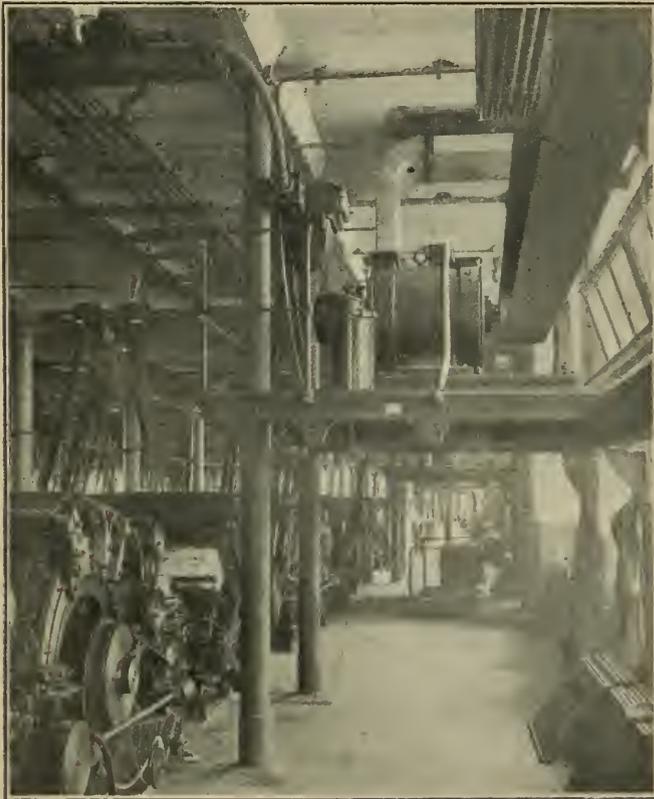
50 H.P. 3-BEARING TYPE MOTOR DRIVING CARDING ENGINES. ONE OF 24.
